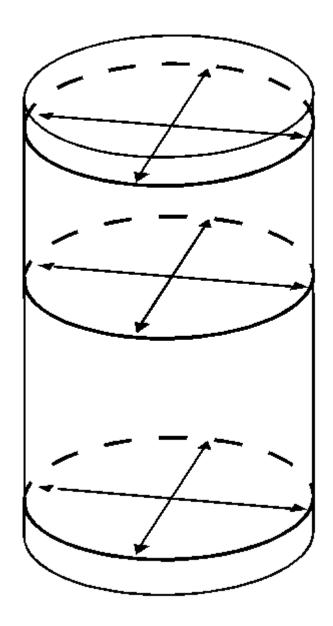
Measuring Cylinder Bore For Taper, Out-Of-Round & Oversize Courtesy of GENERAL MOTORS CORP.
